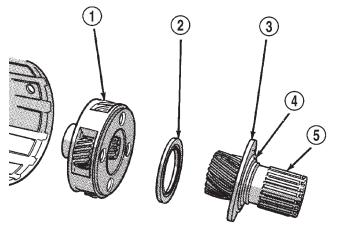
Removing Sun Gear, Thrust Bearing And Planetary Gear
